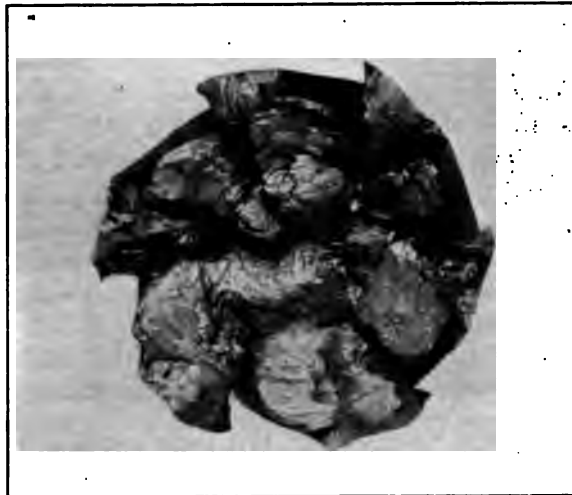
CHARACTERISTIC FRACTURES PARALLEL SHAFT
